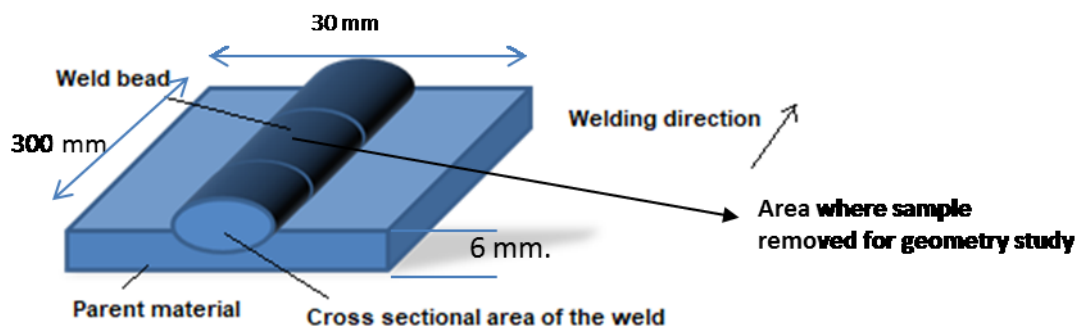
Schematic drawing of the Bead on Plate (BOP) welds
